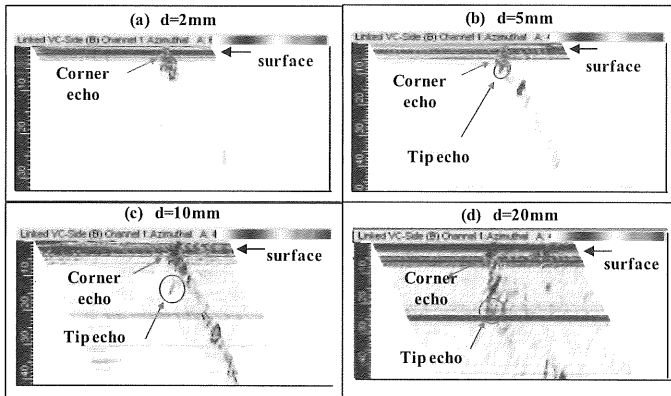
B-scan image of EDM notch specimen by PAUT (Weld metal)
